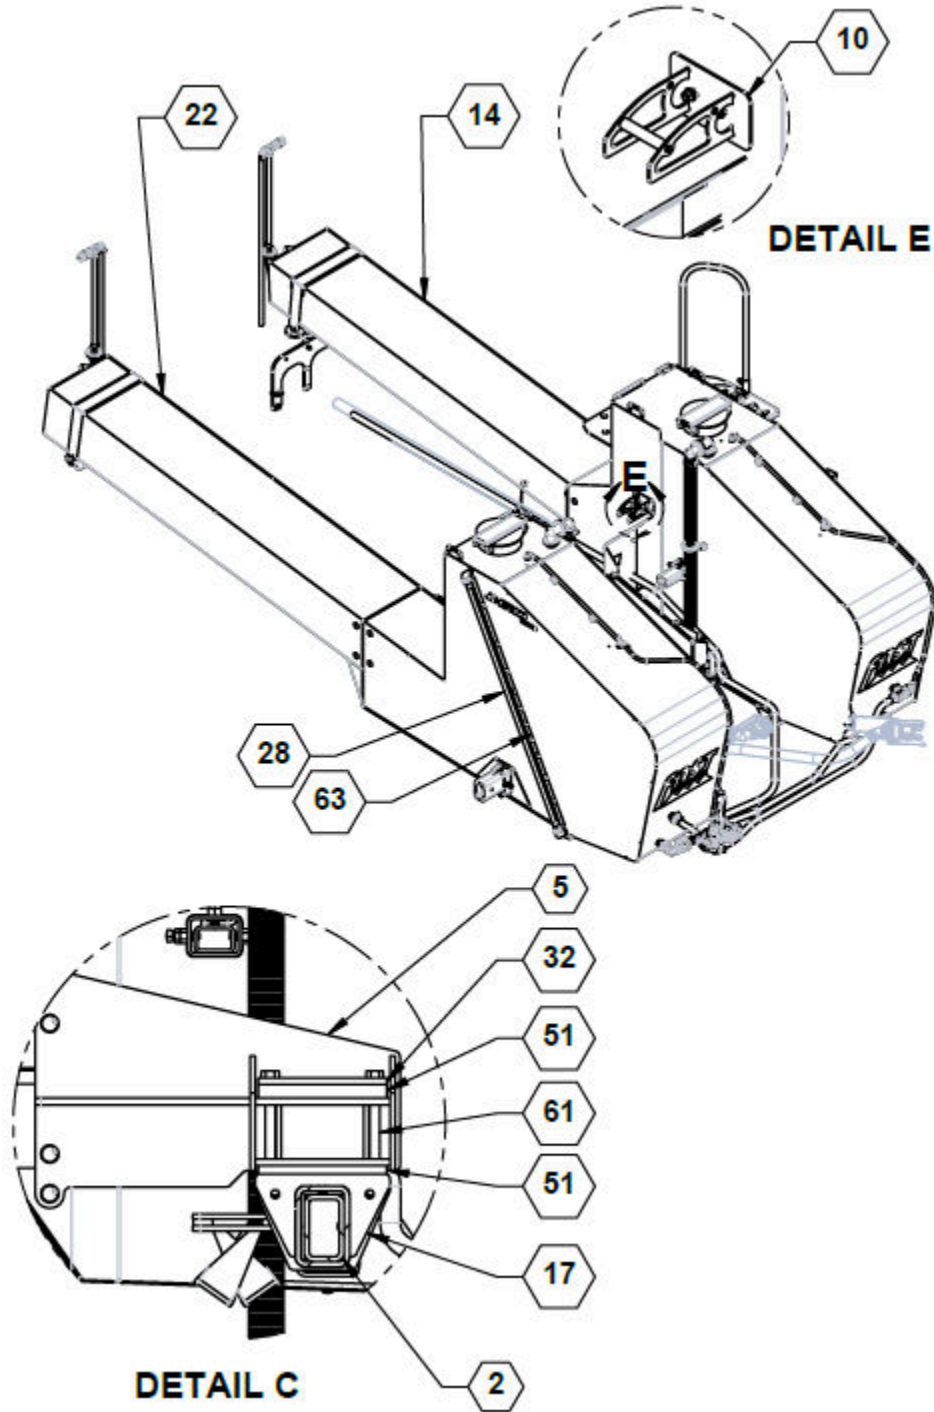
Supply hose to rear of tractor zip-tied to frame components.
